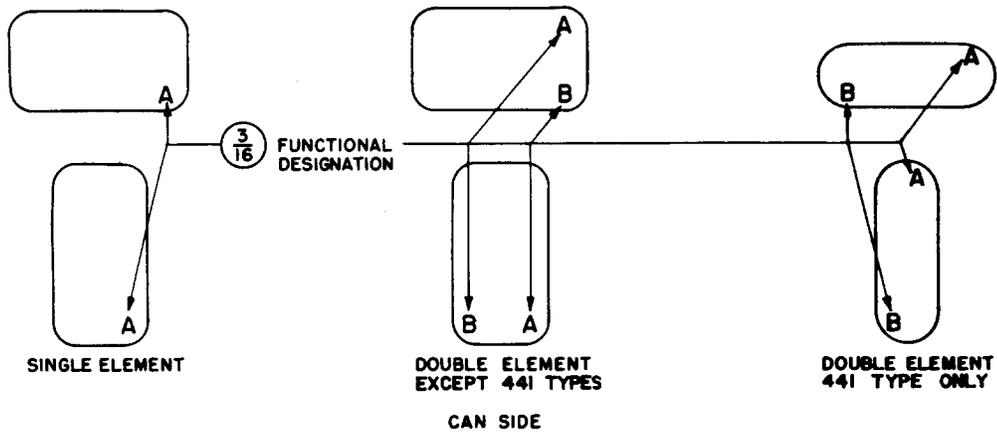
Capacitors - Stud Mounted for Step-by-Step Switch Unit Mounting Plates
